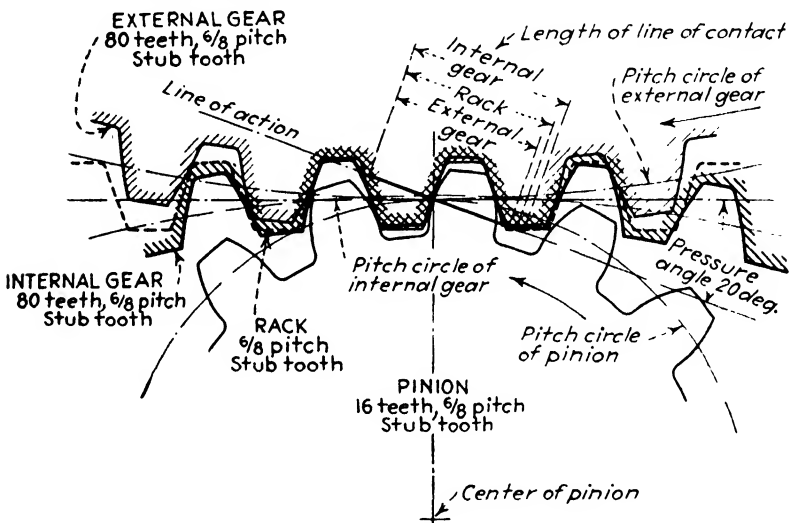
Length of contact of pinion and external gear, of rack and of internal gear.
